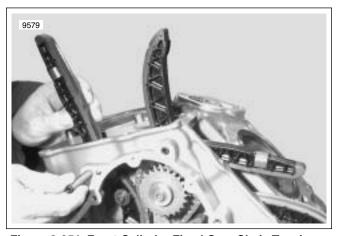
Front Cylinder Fixed Cam Chain Tensioner
